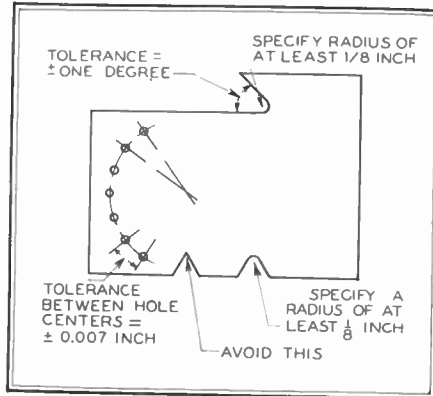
HOLE TOLERANCES AND FILLETS
